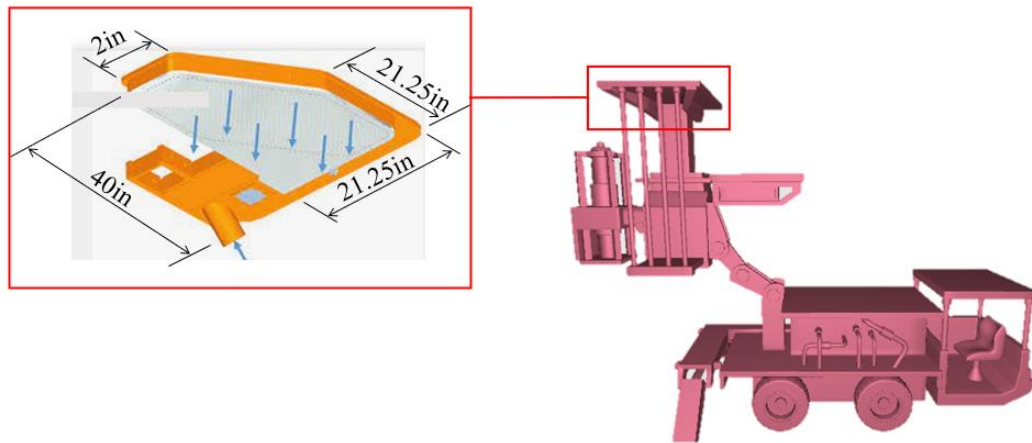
CAD drawing of a typical roof bolter equipment showing the structure of the canopy air curtain mounted on its canopy
